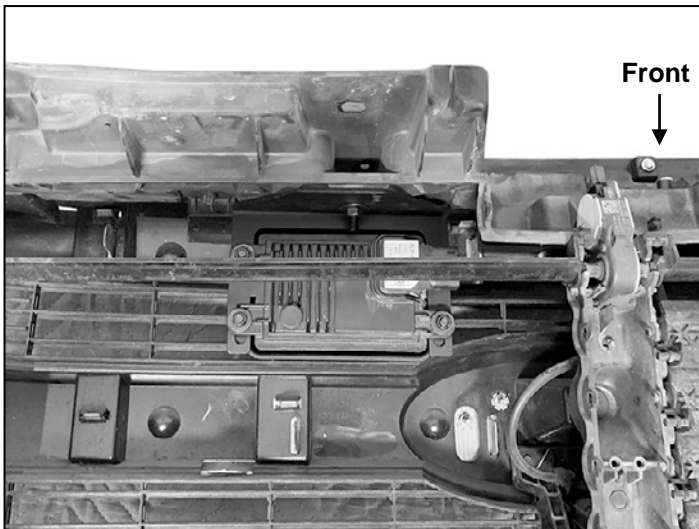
Before drilling holes, make sure holes and hardware will be clear of reinforcing ribs molded into the top of the grille (arrow)
